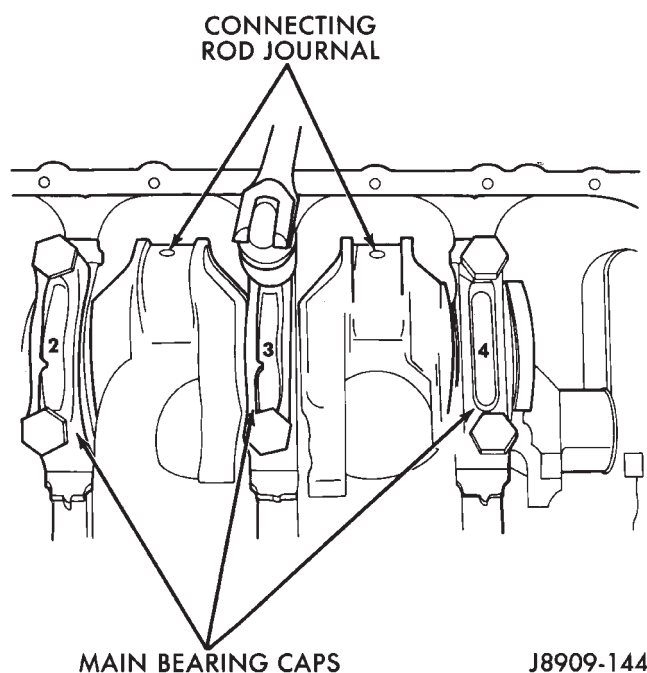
Removing Main Bearing Caps and Lower Inserts
